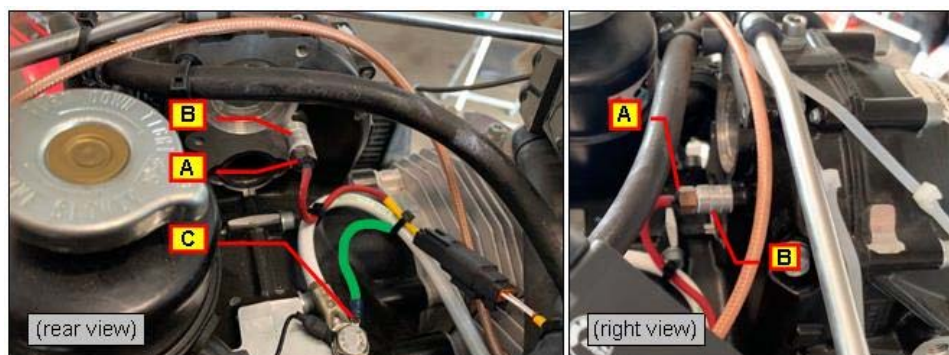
Example: Threaded Element located in cylinder head mounting boss, preferred location on Rotax 912, 914, and 915 series engines, refer to § 3.3.
